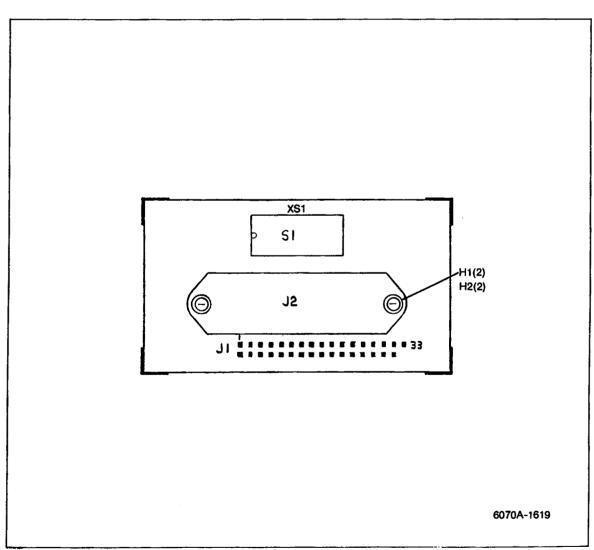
A6A1 IEEE Connector PCB Panel Assembly
